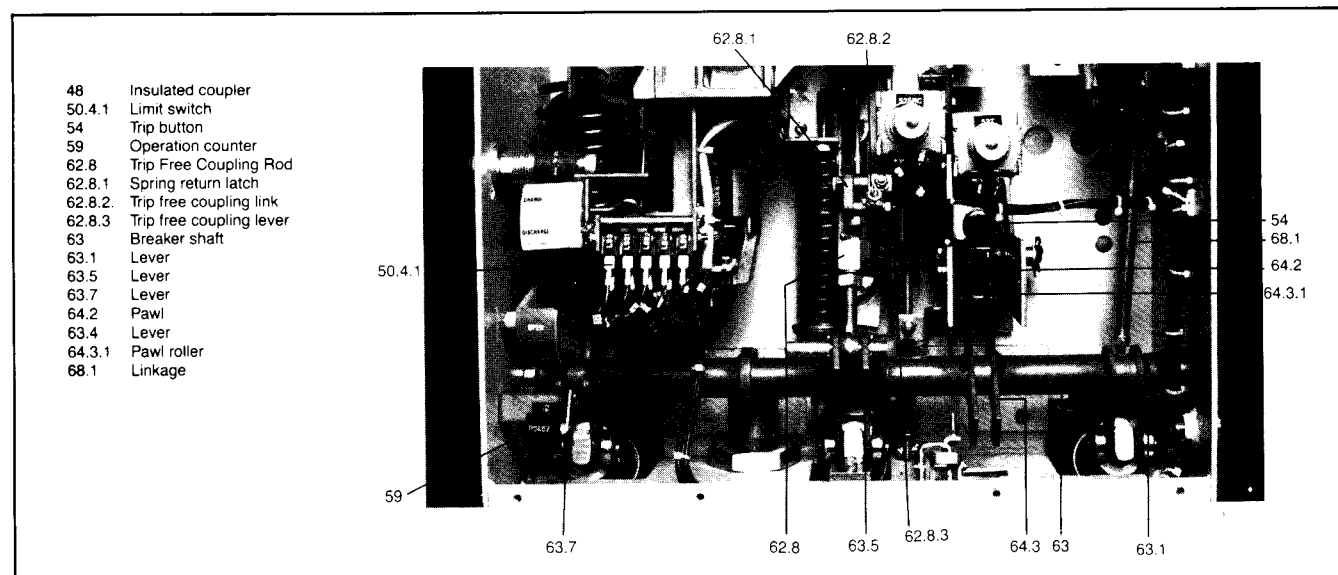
Breaker Shaft in Open Position—Closing Springs Discharged
